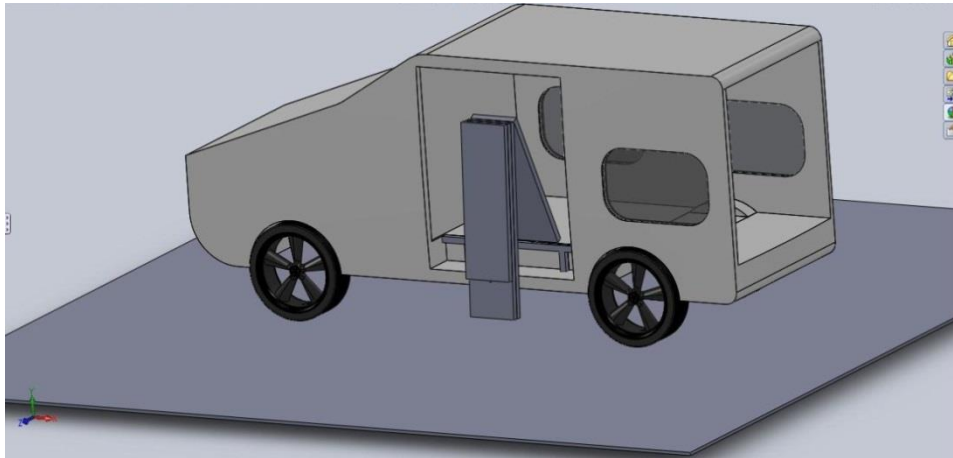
through 7 demonstrate how the ramp will fold and stow away when not needed. After the ramp is folded to its minimum size, the ramp will slide on the rail in order to move out of the way.
